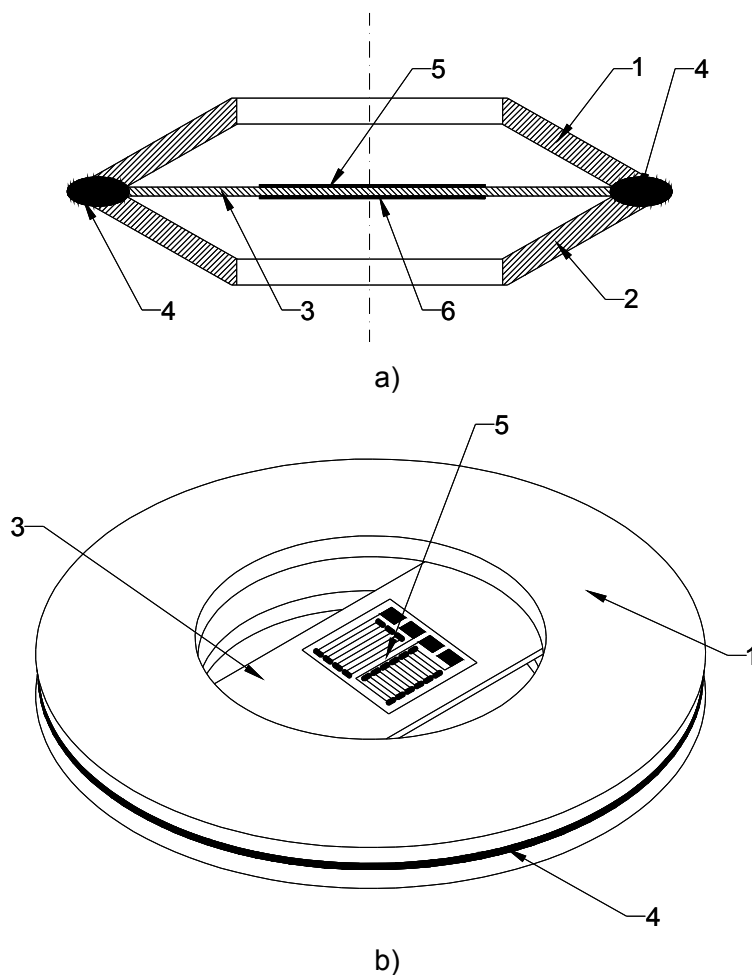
Sketch of the force sensor; a) section view, b) isometric view
